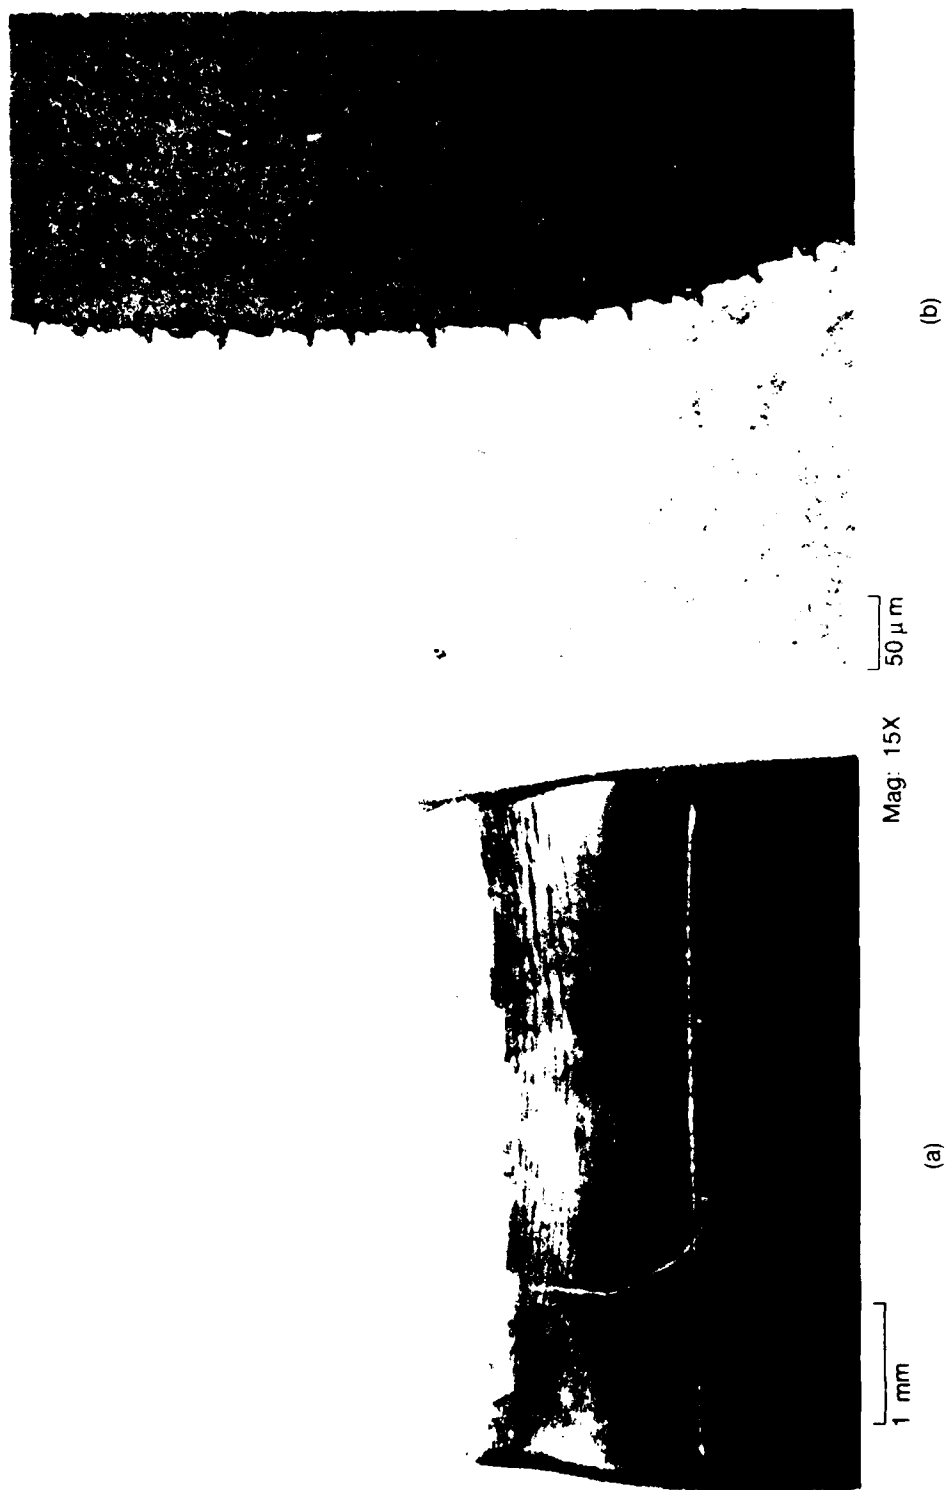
Notch Appearance of Specimen in Previous Figure at "Overstress" Final Failure Side Showing Brittle Cracking of Surface Layer
